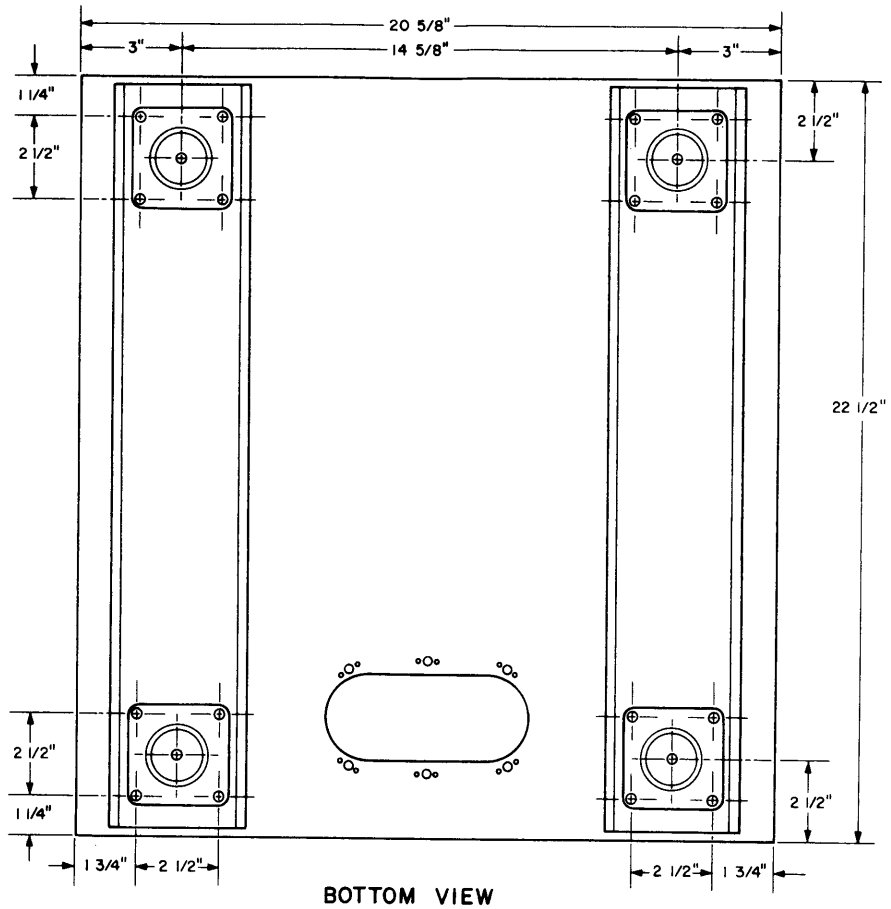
Dimensioned Installation View of SBT-1K(C), Shock Mounted
